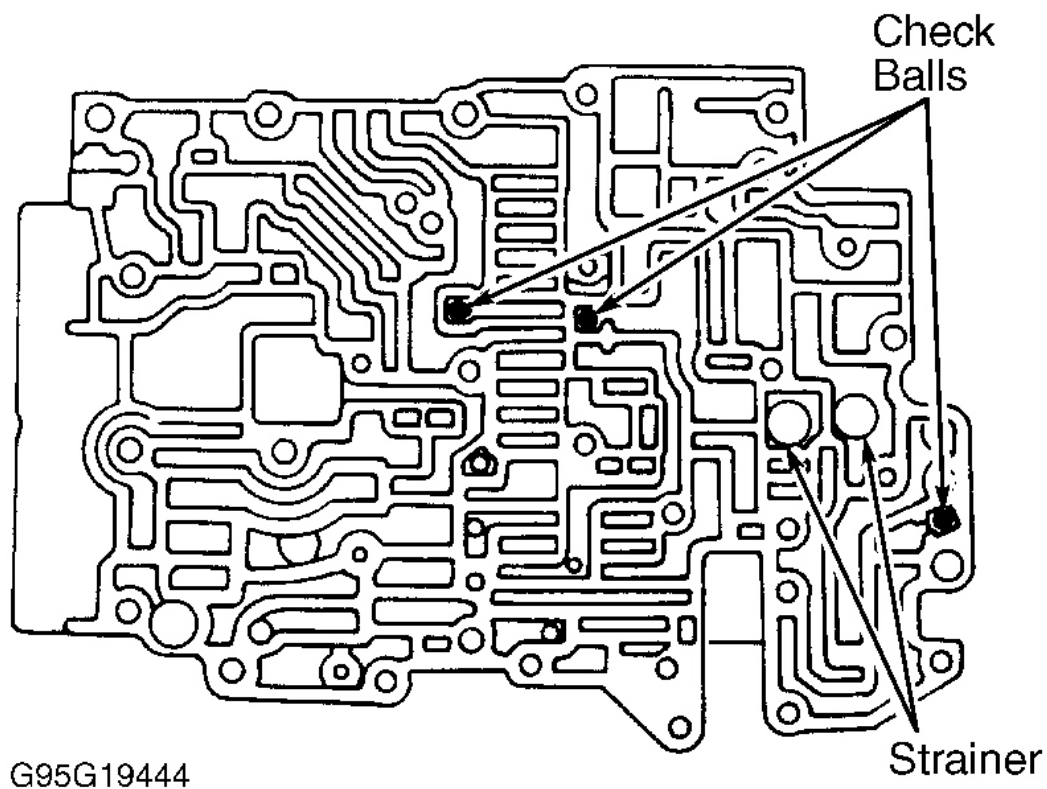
Locating A-540E Lower Valve Body (Bottom) Check Balls
